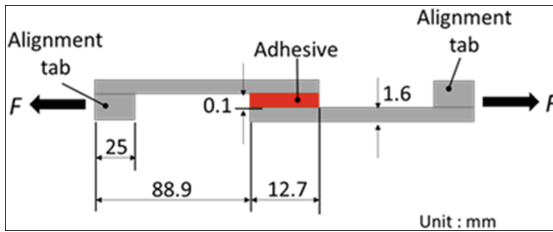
The dimension of single lap joints with 0.1 mm thickness of adhesive.
